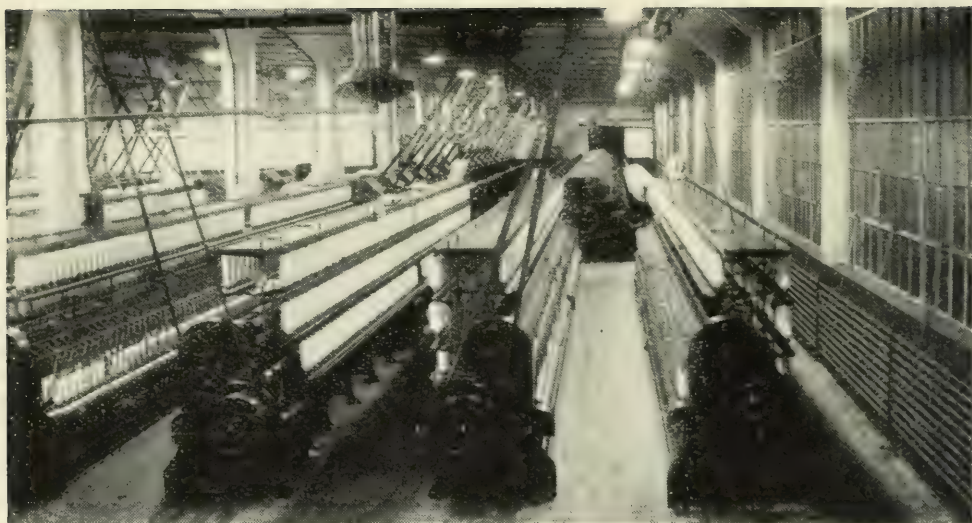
Lighting a finishing roving section. Photograph by courtesy of J. E. Serrine.
